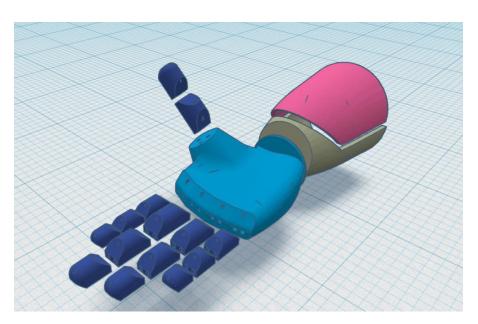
Isometric projection of the 3D Printed Hand [11]
